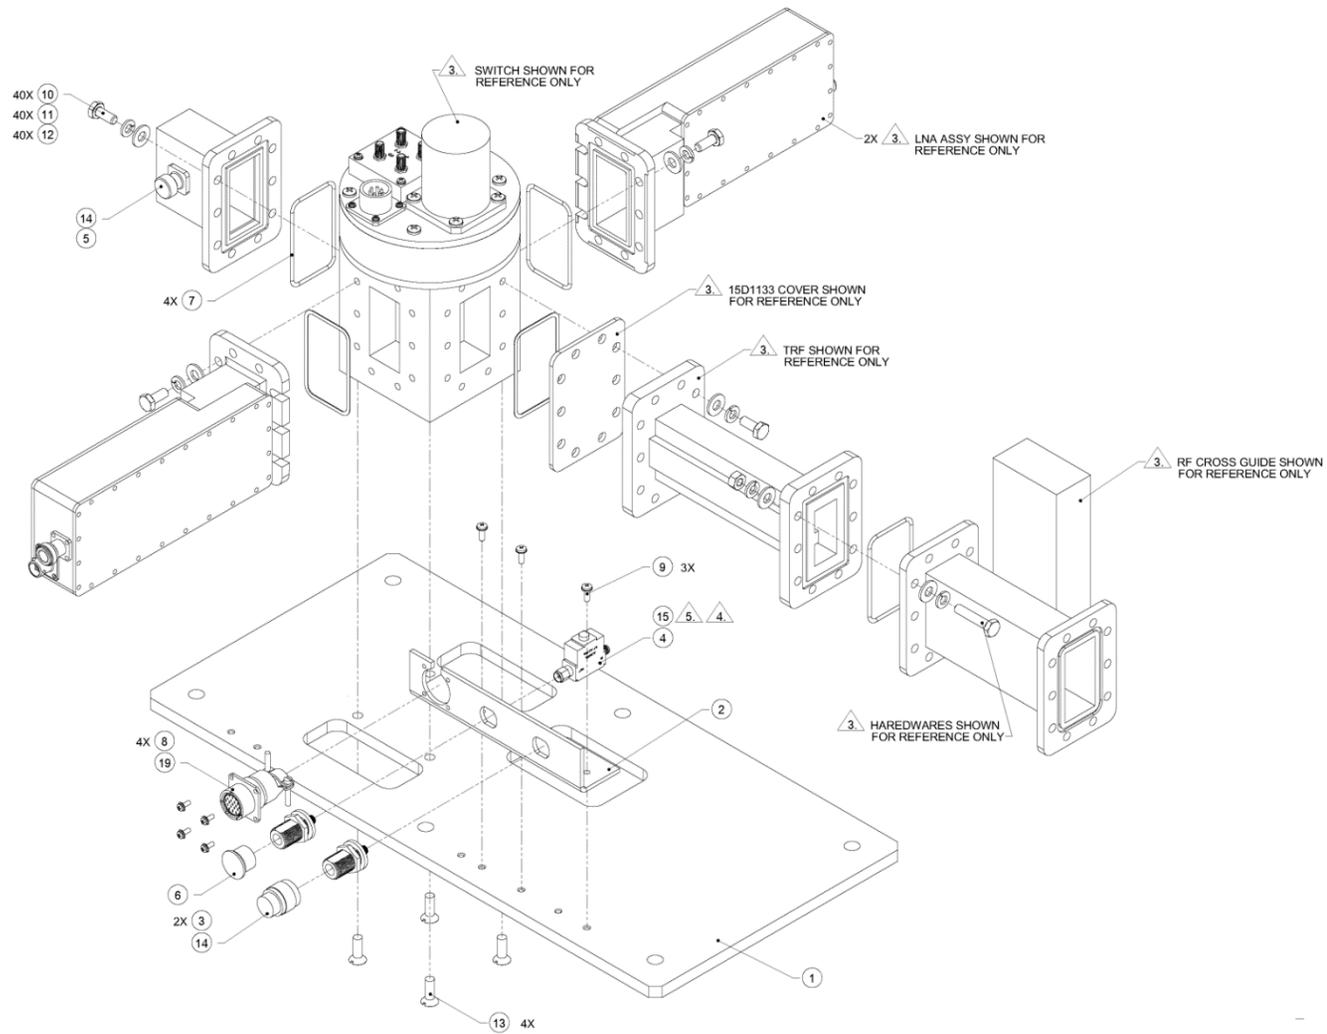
C-Band LNA 1:1 Redundant System (Exploded View)
